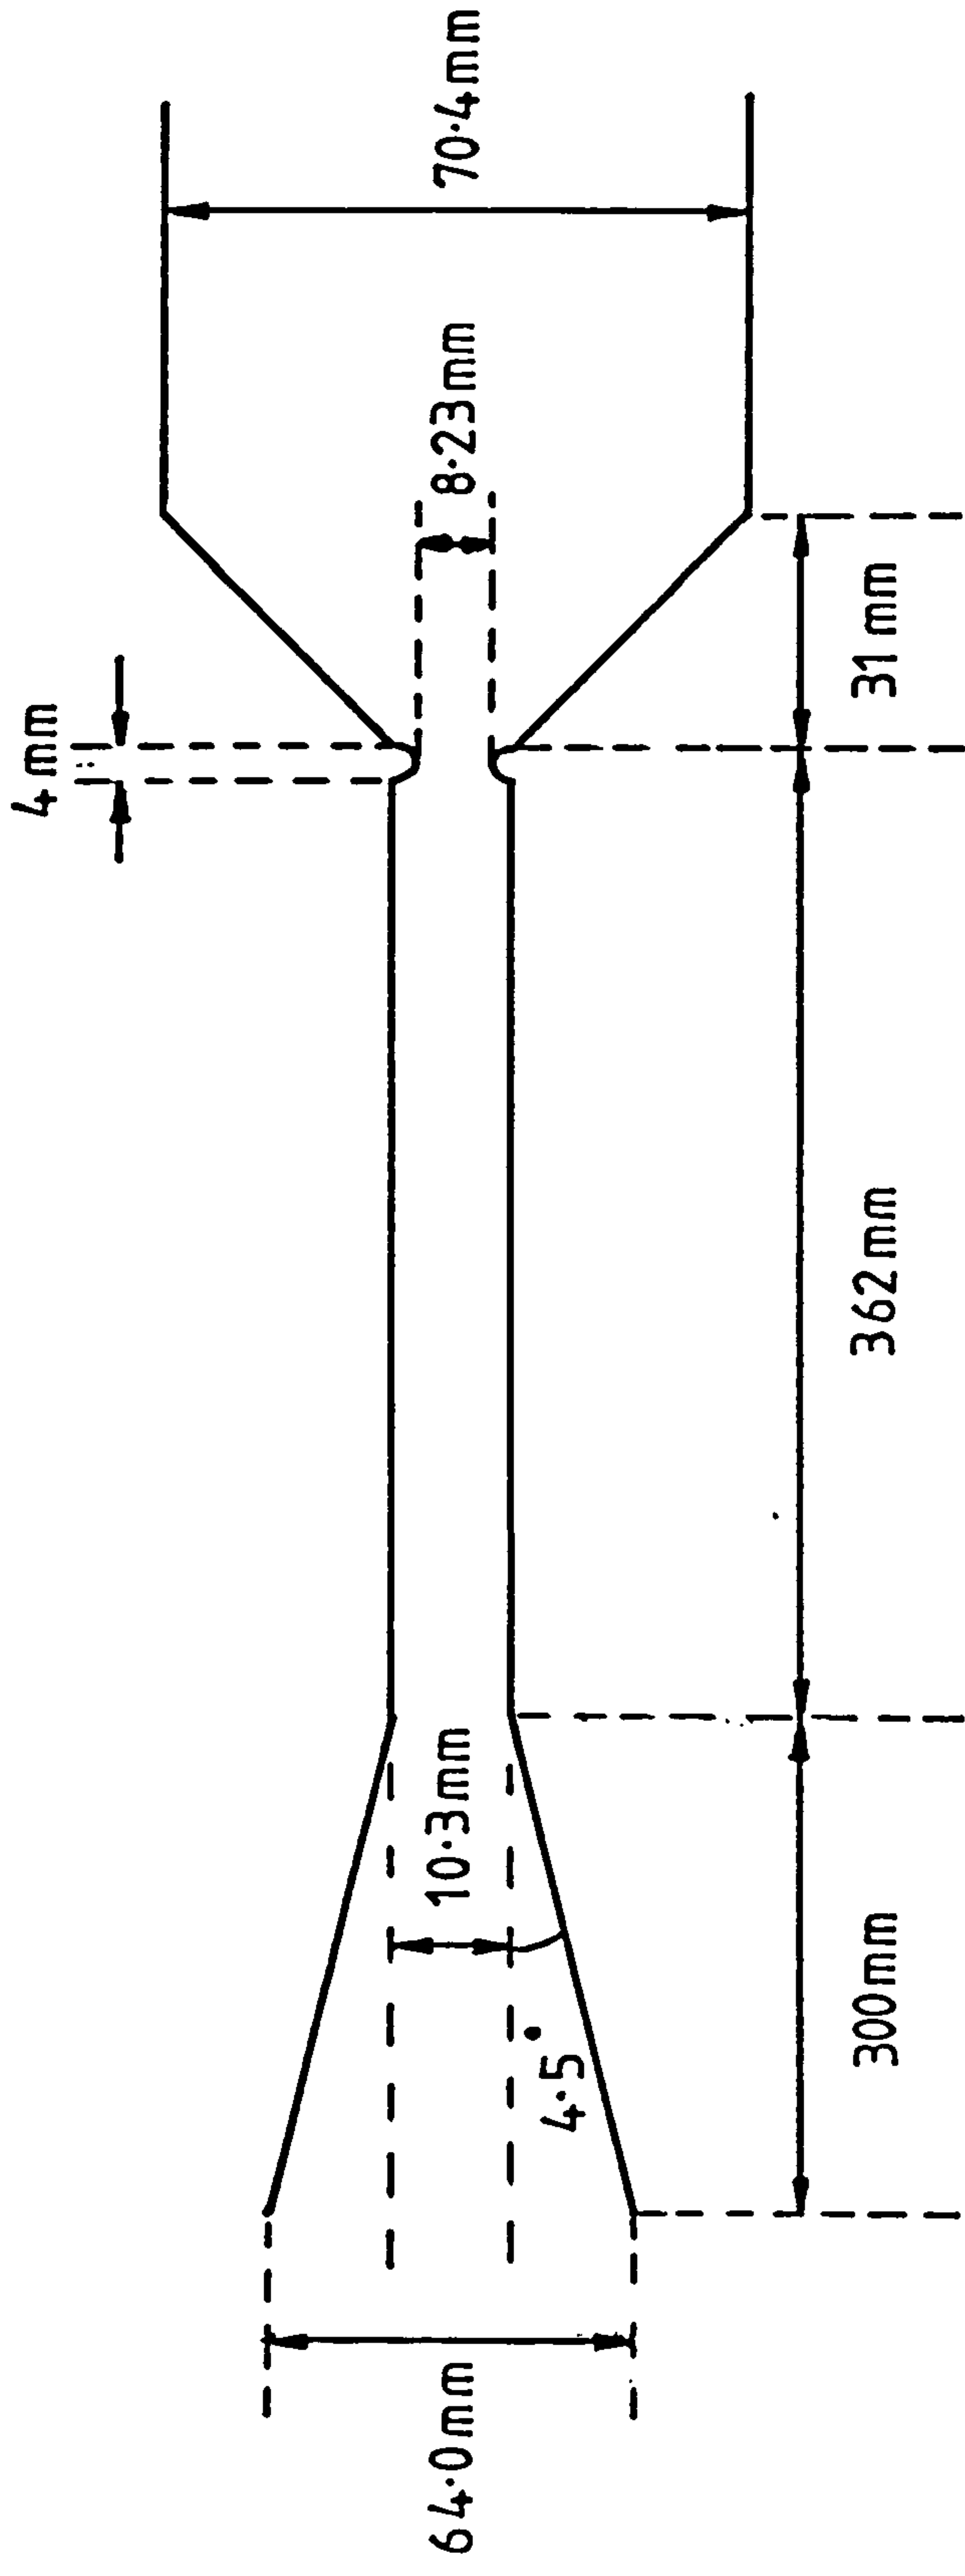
Design and dimensions of the Mk-6 E.C.M. anode/cavity.
